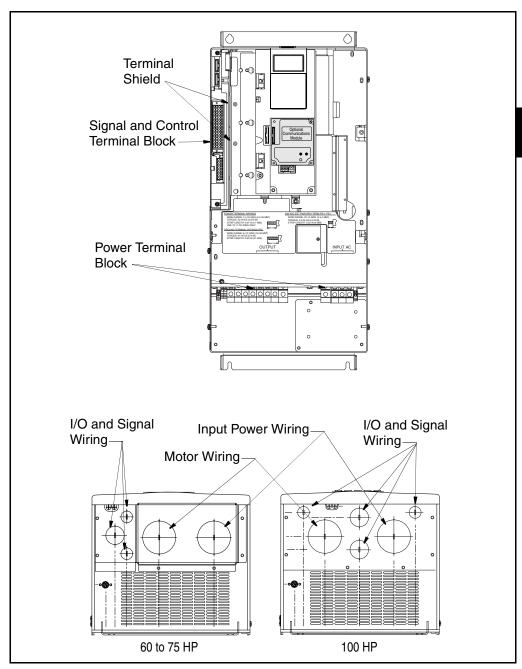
Wire Routing and Terminal Block Locations (Frame 5 Shown)
